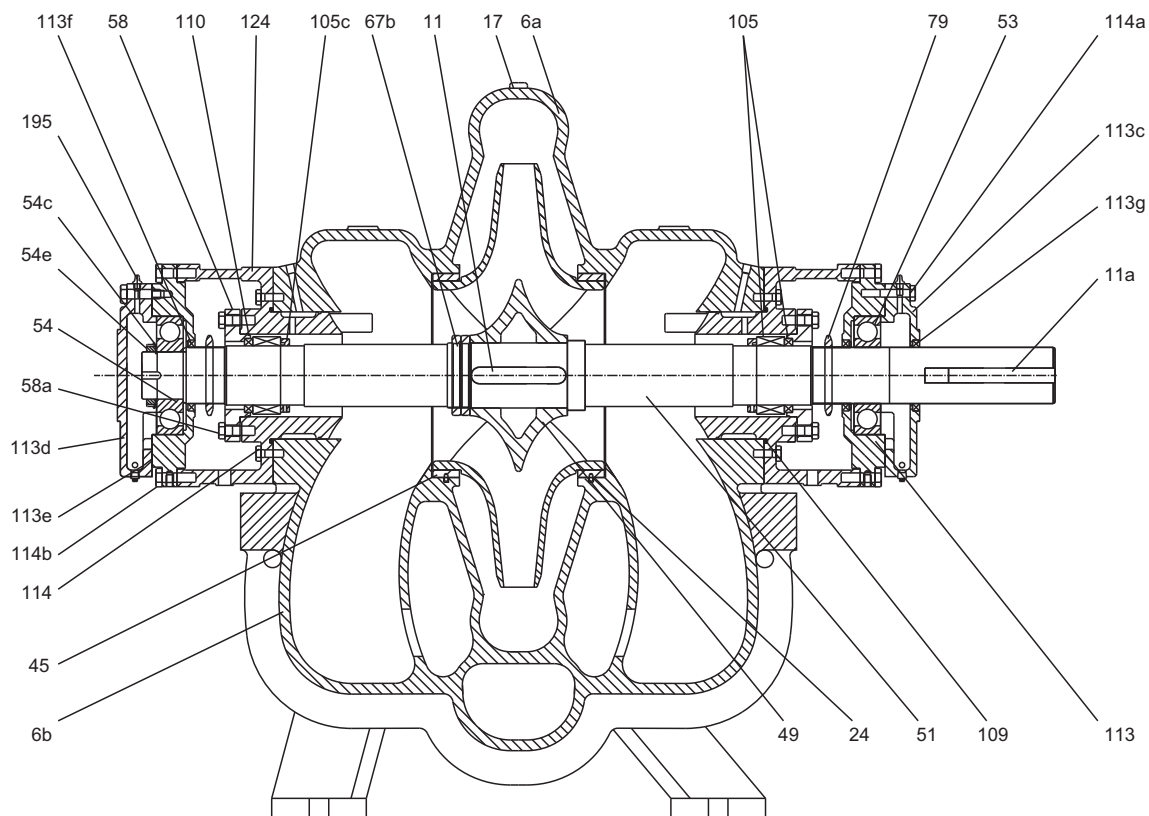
Sectional drawing, standard construction type 1, with mechanical shaft seals
